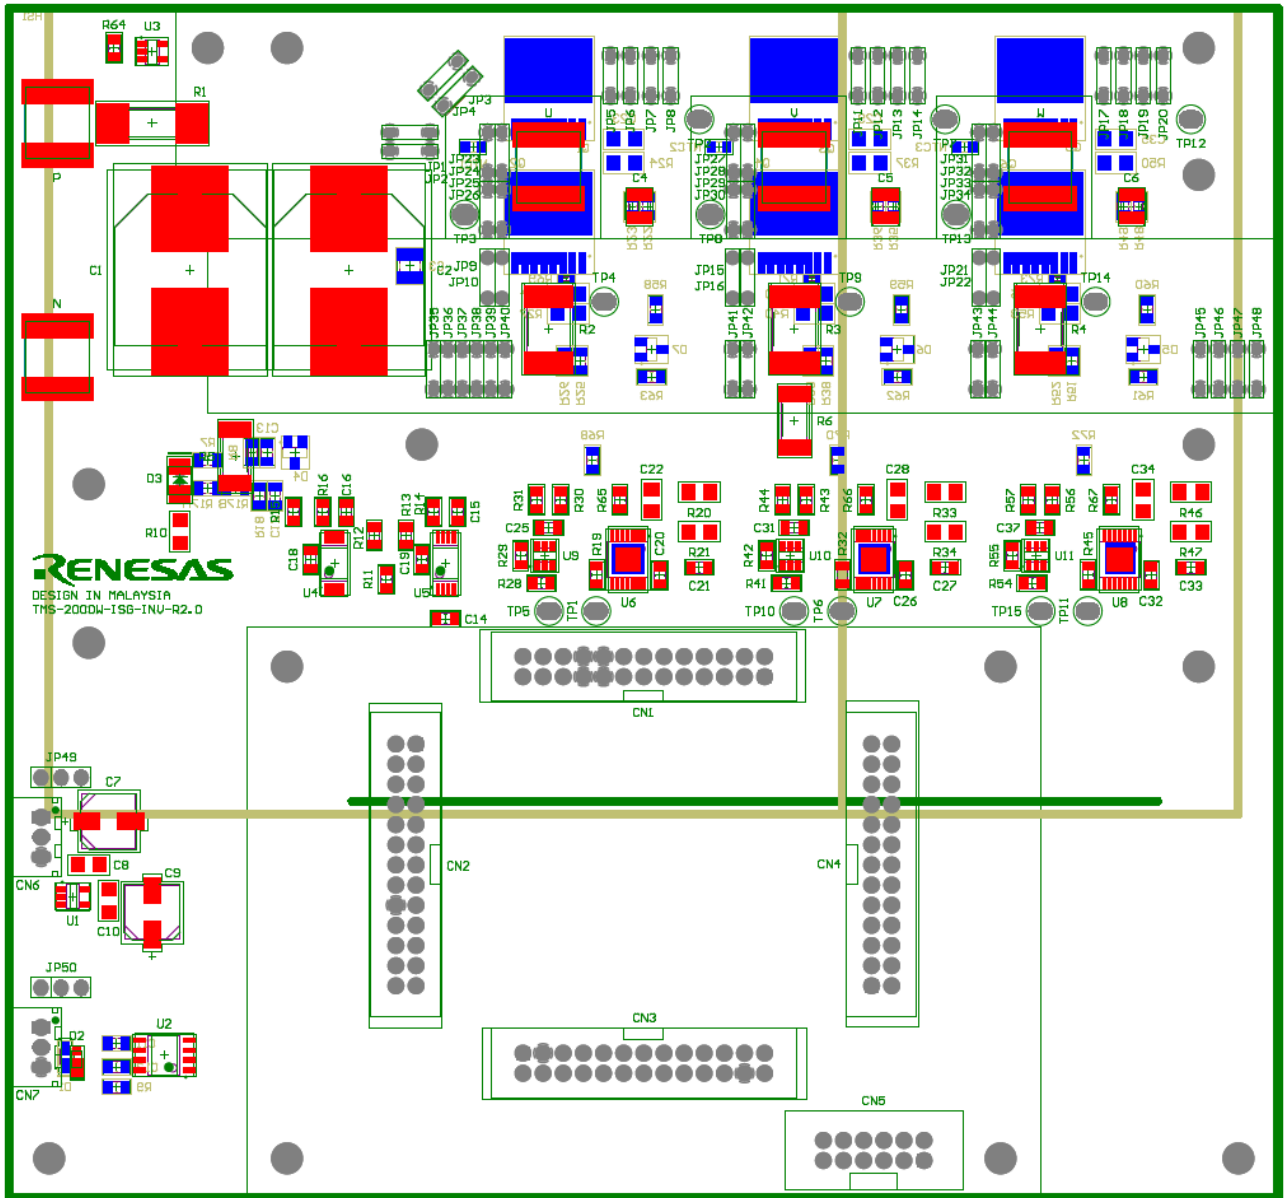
Silkscreen layer of Power Board PCB Layout
